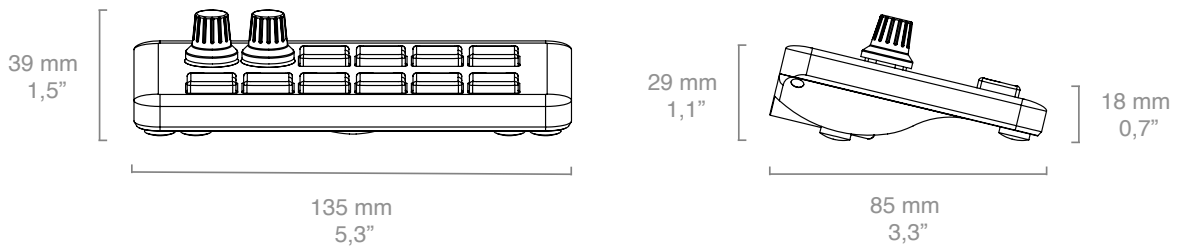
Technical drawing of Quick Pad with key dimensions and layout details.
